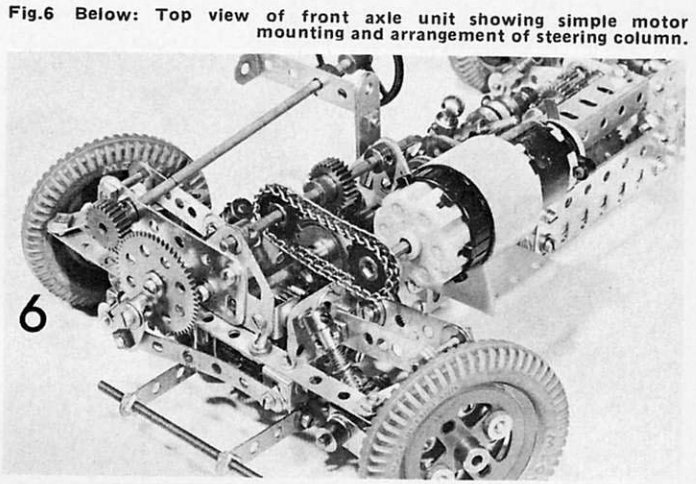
Below: Top view of front axle unit showing simple motor mounting and arrangement of steering column.
